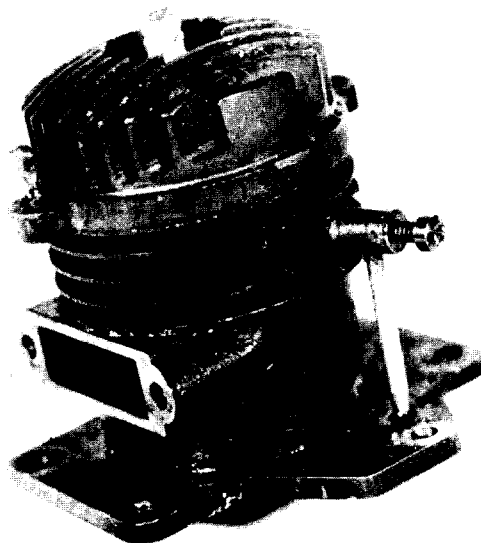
Welded Construction Used on Ruckstell-Hayward Cylinder
